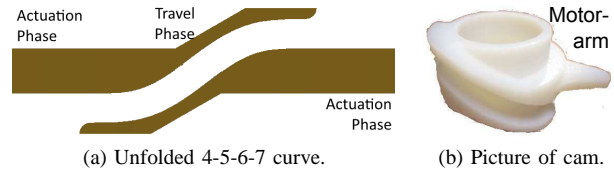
The cylindrical cam mechanisms with fixed motor arm are printed with PolyJet prototyping technology of Materialise ©, Belgium.
